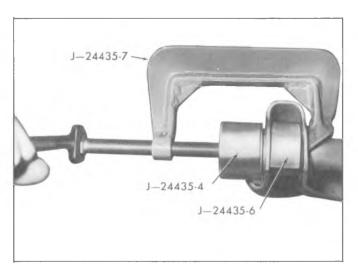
C-26--L.C.A. Rubber Bushing Installation
